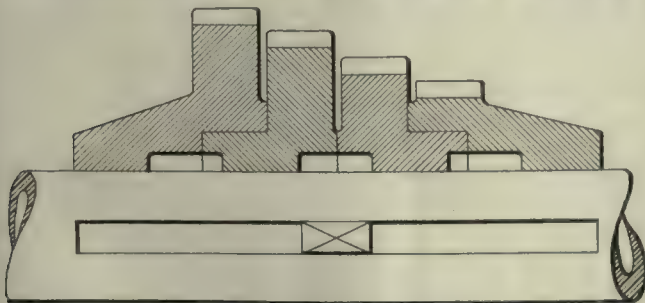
CONSTRUCTION TO INCREASE LENGTH OF GEAR BEARING
